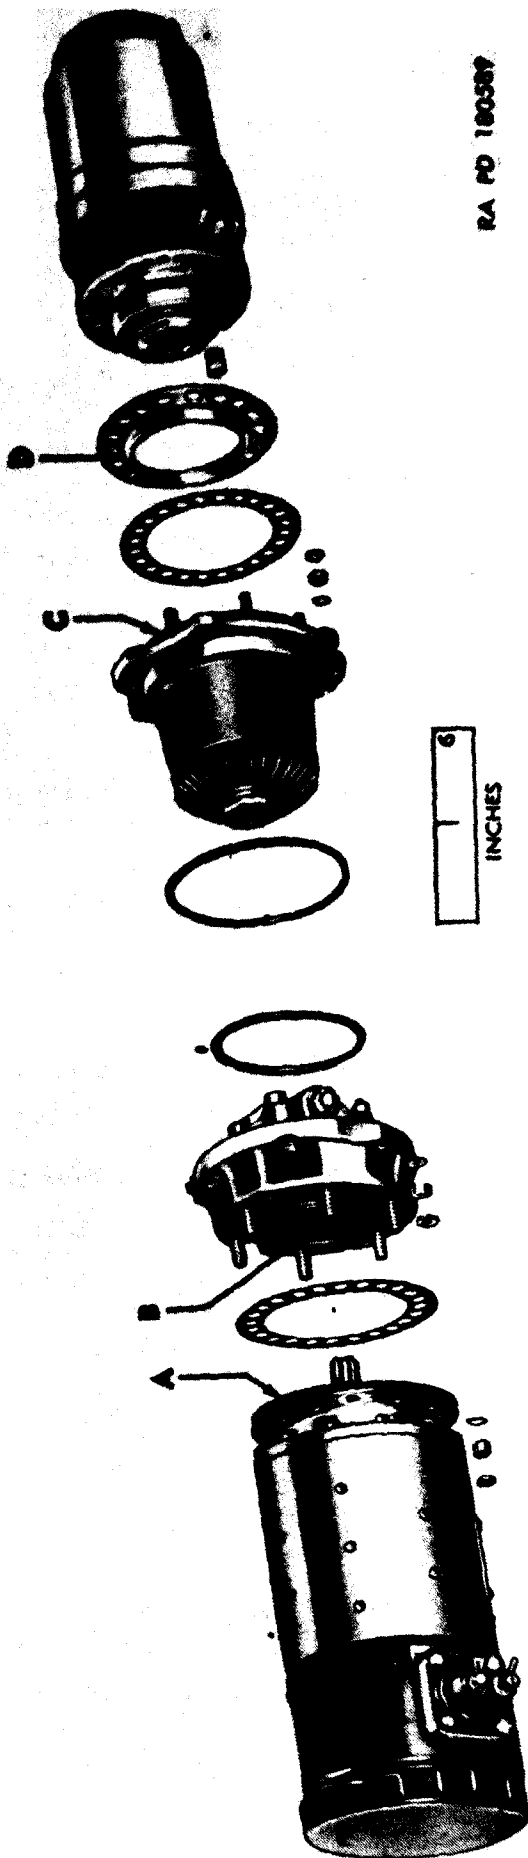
Repair and rebuild standard points of measurement for starter and generator mounting pilots.
